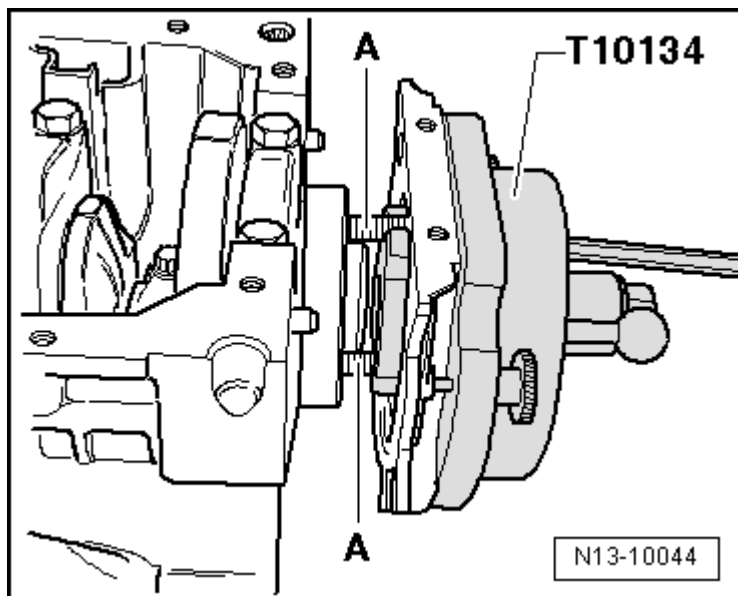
Identifying Assembly Tool T10134 Secured Onto Crankshaft Flange Using Socket Head Hex Bolts
